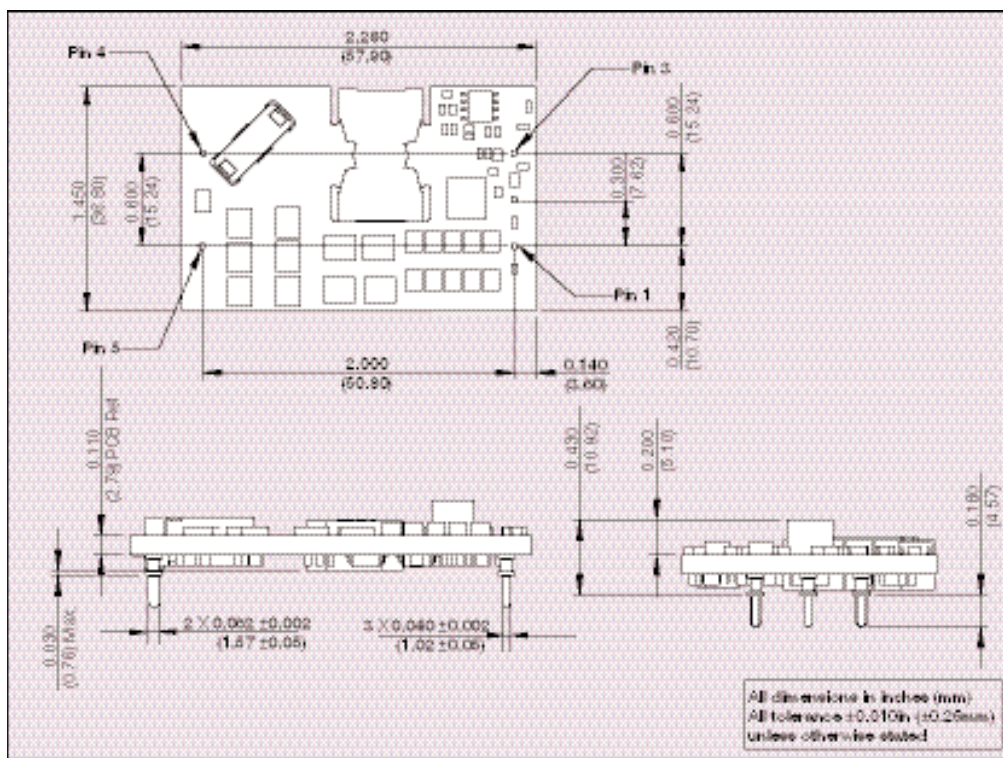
Horizontal Mechanical Drawing and Pinout Table
